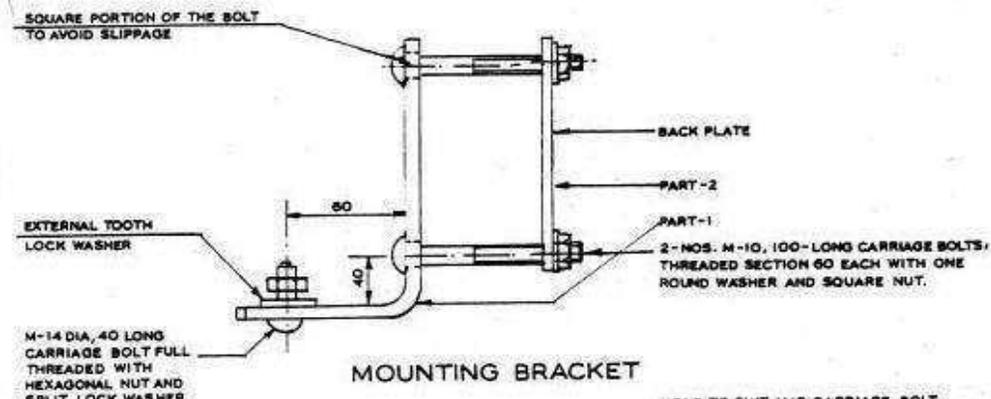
MOUNTING DETAILS OF 11KV FUSE CUTOUT
